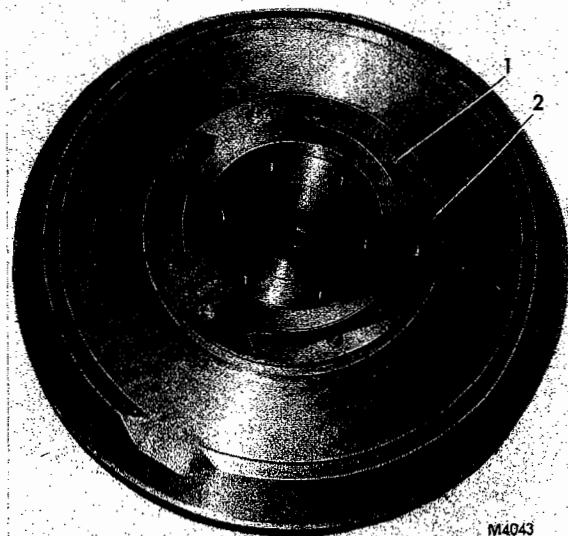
INPUT SHAFT BOLTED TO THE RUNNER
